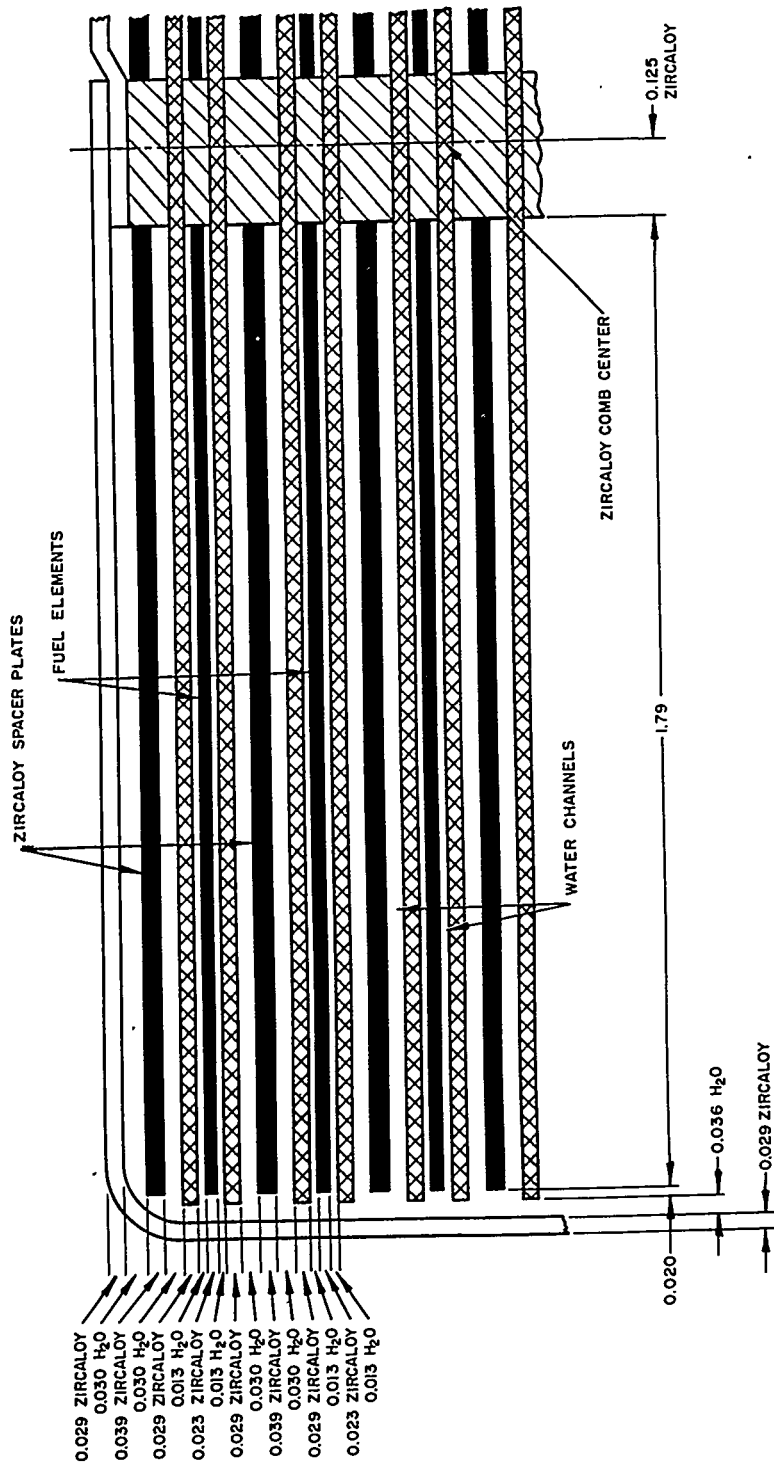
Detailed Construction of PTR Fuel Module. (Dimensions in inches.)
